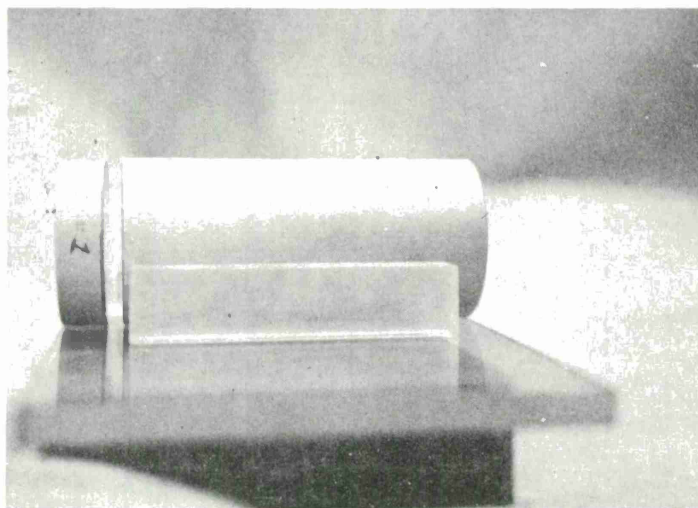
Example of Fiber Optic Boule Assembly After One Saw Cut
